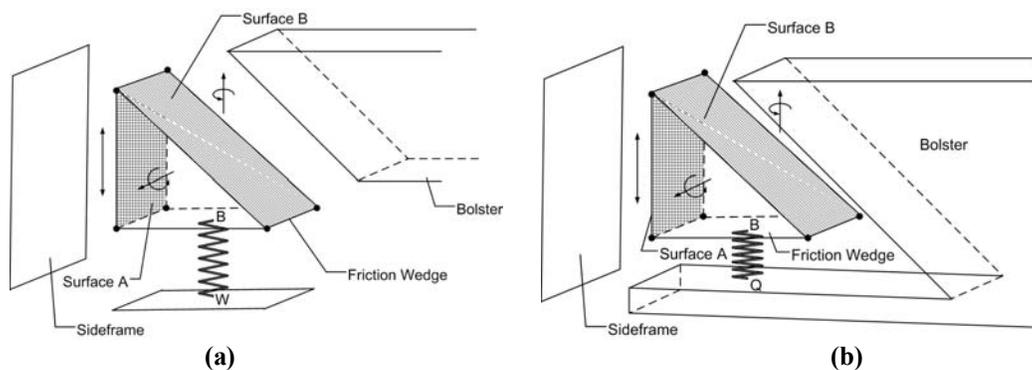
(a) Exploded view of the Side Frame-Friction Wedge-Bolster System for the Variably-damped wedge model. (b) Exploded view for the Constantly-damped wedge model.
